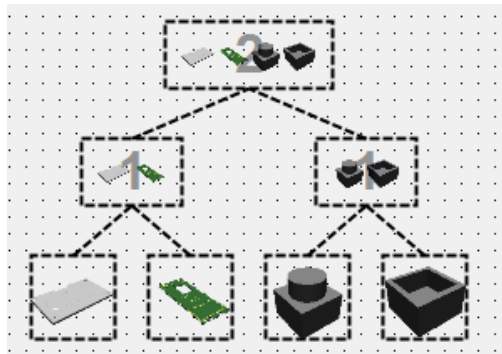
An assembly graph for a partial assembly of a cell phone. A metal plate, a *shield can*, is pressed onto a printed circuit board (PCB) and a cell phone camera is inserted into a socket. The camera socket is then fastened on the PCB.
